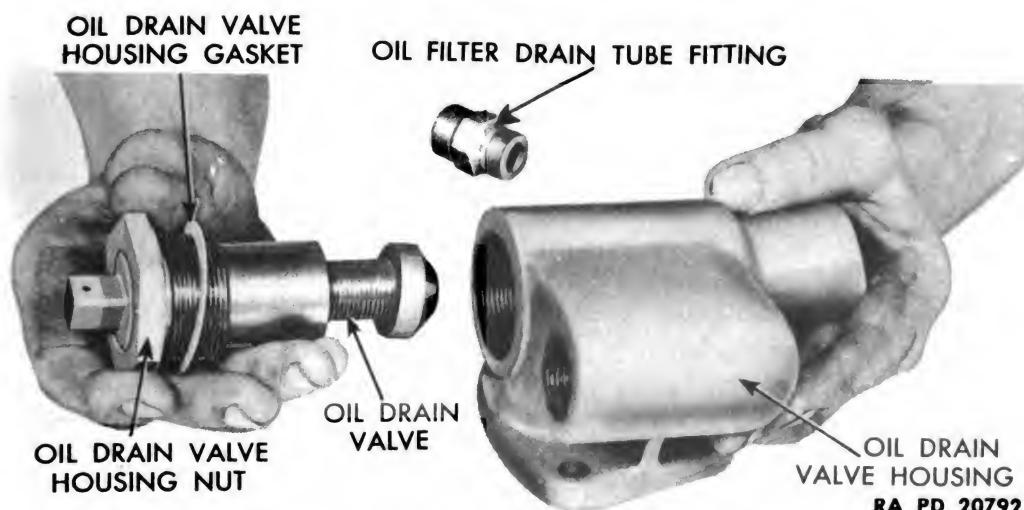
Removing Oil Drain Valve From Oil Drain Valve Housing
